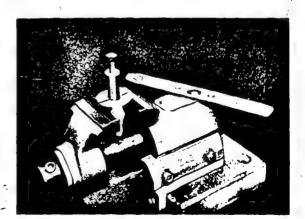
0 681 340 015 (EFEP 322) assembly tool clamped in
